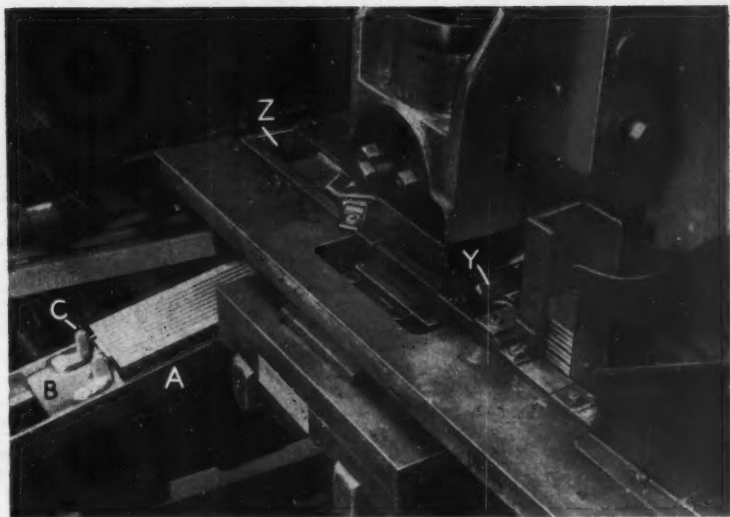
General view of the last press in the bank whereby forming is completed. Completed plates are discharged into a chute that feeds a stacking unit, the work holder of which is seen extending from the front of the press
